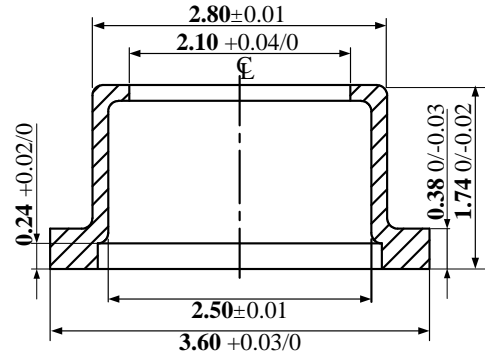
Dimensions of R/F switch connector shell(Unit: mm)
